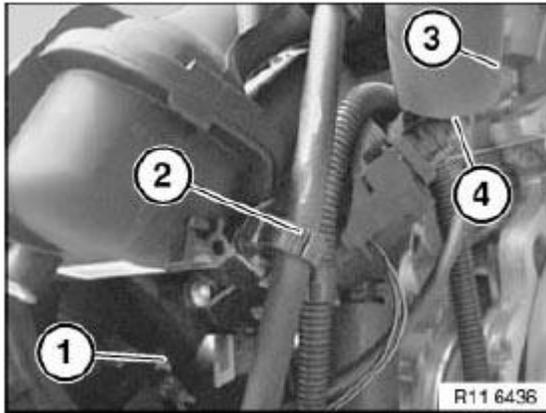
Identifying Plug Connection And Crankcase Breathers
